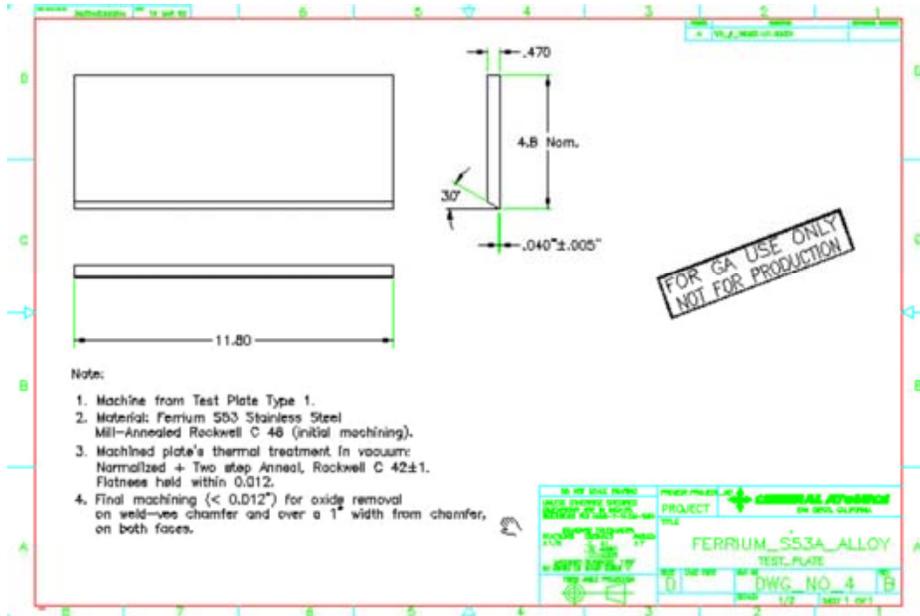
Design drawing of beveled-edge Test Plate for GTA welding experiment.
